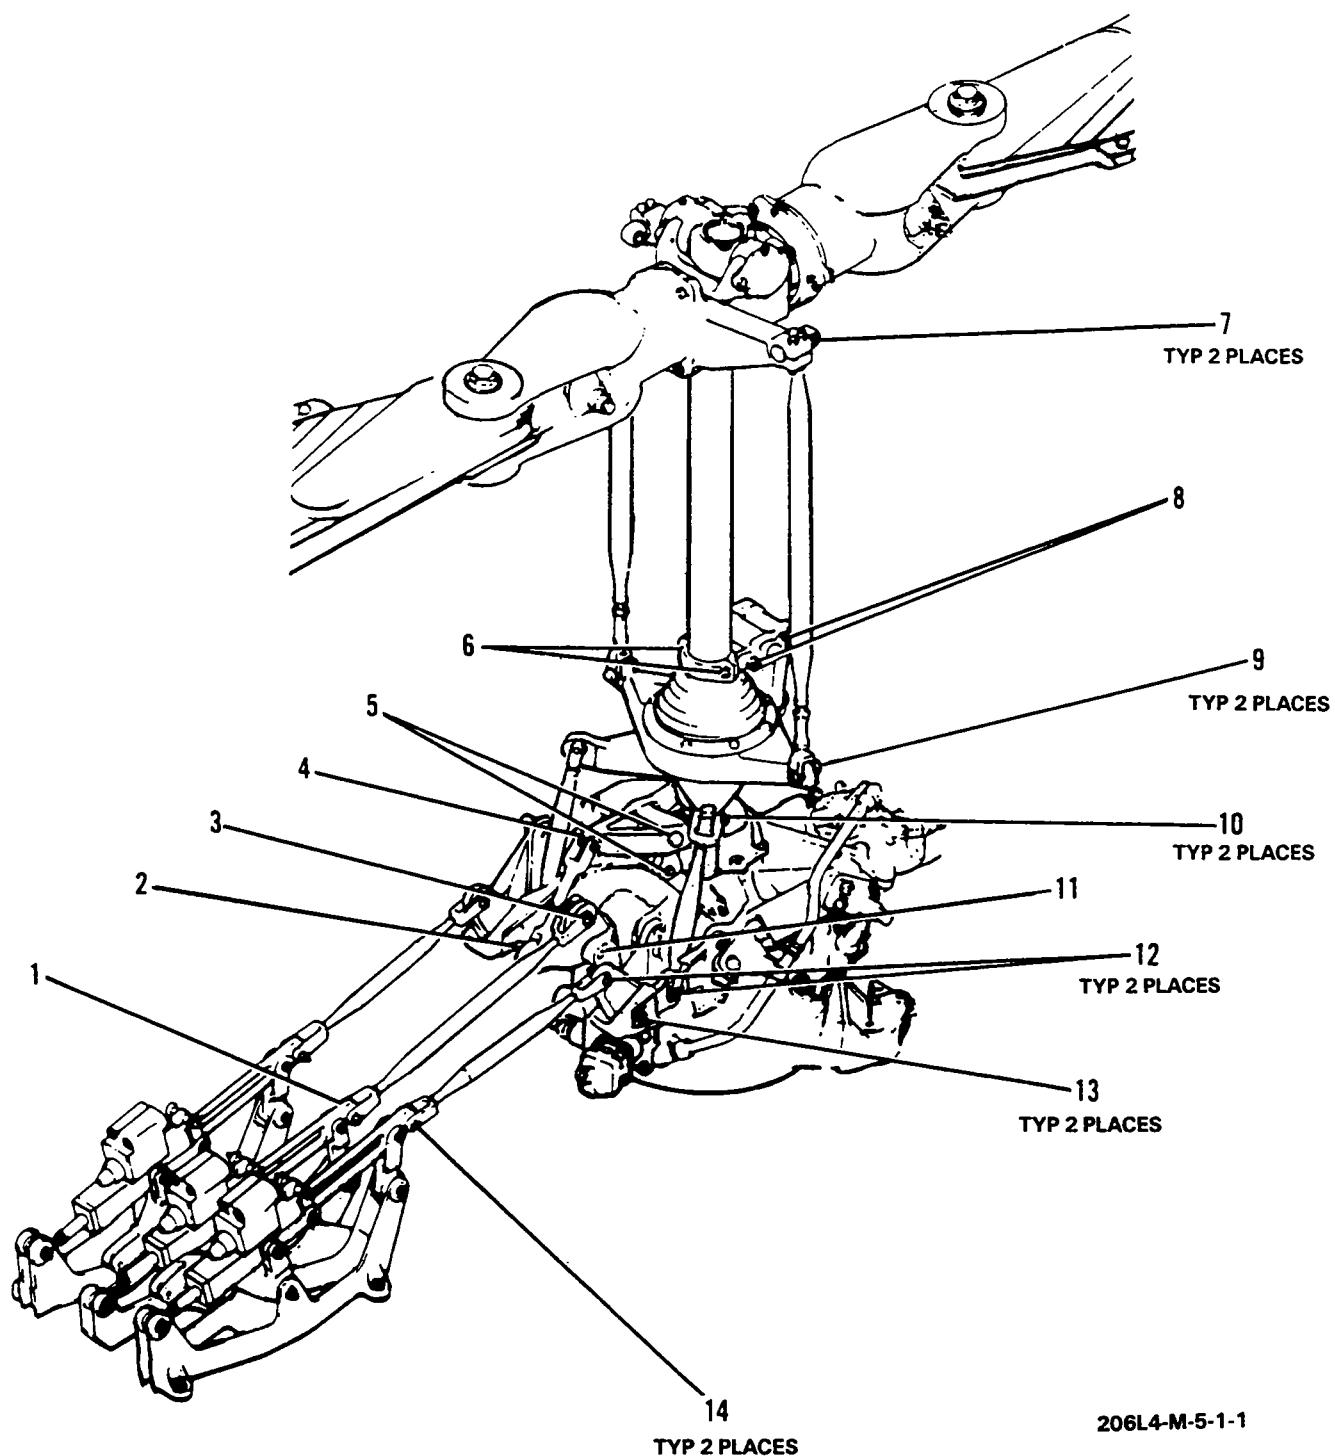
Flight control system bolts (Sheet 1 of 2)
